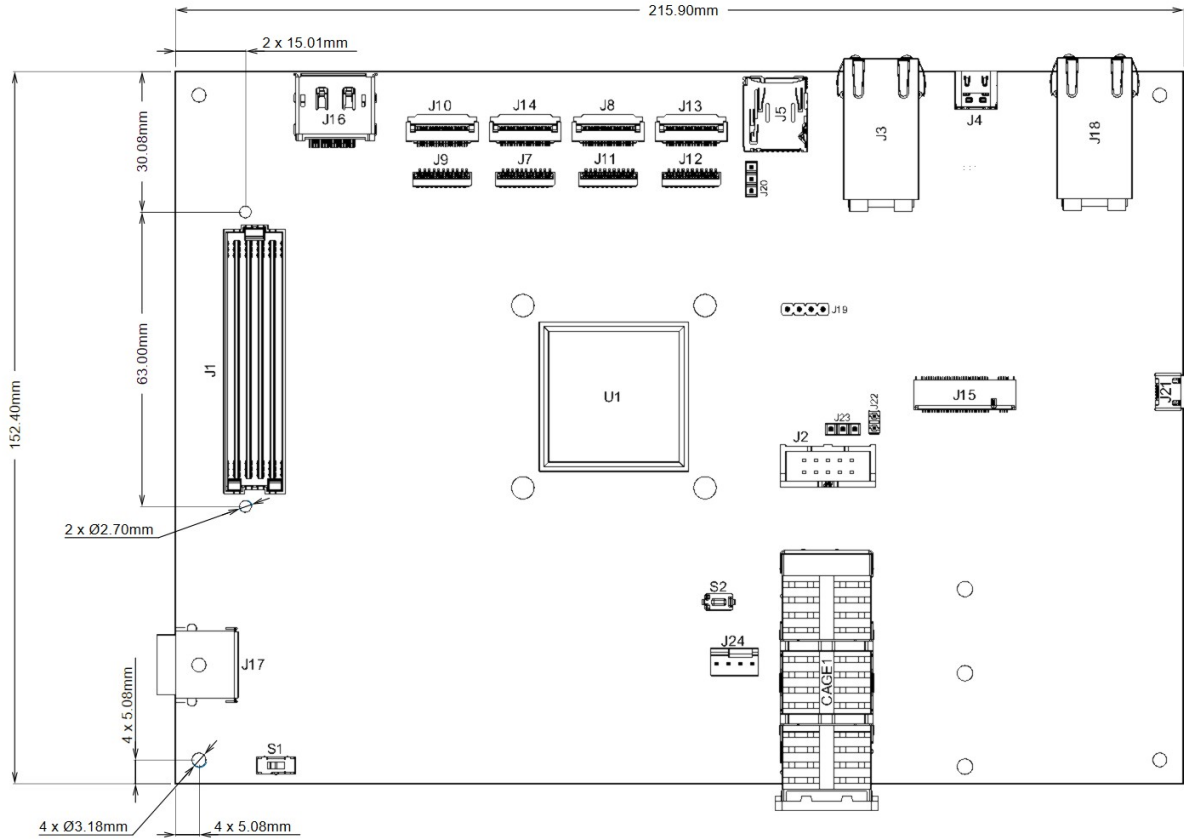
MitySBC-A5E Outline and Mounting Hole Locations (Top View, millimeters)
